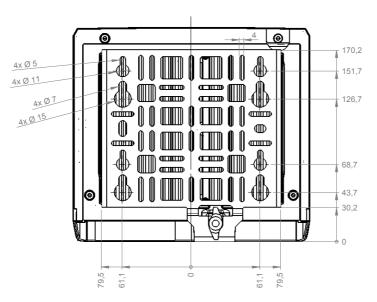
Antenna – Mechanical Drawing (front, bottom)
